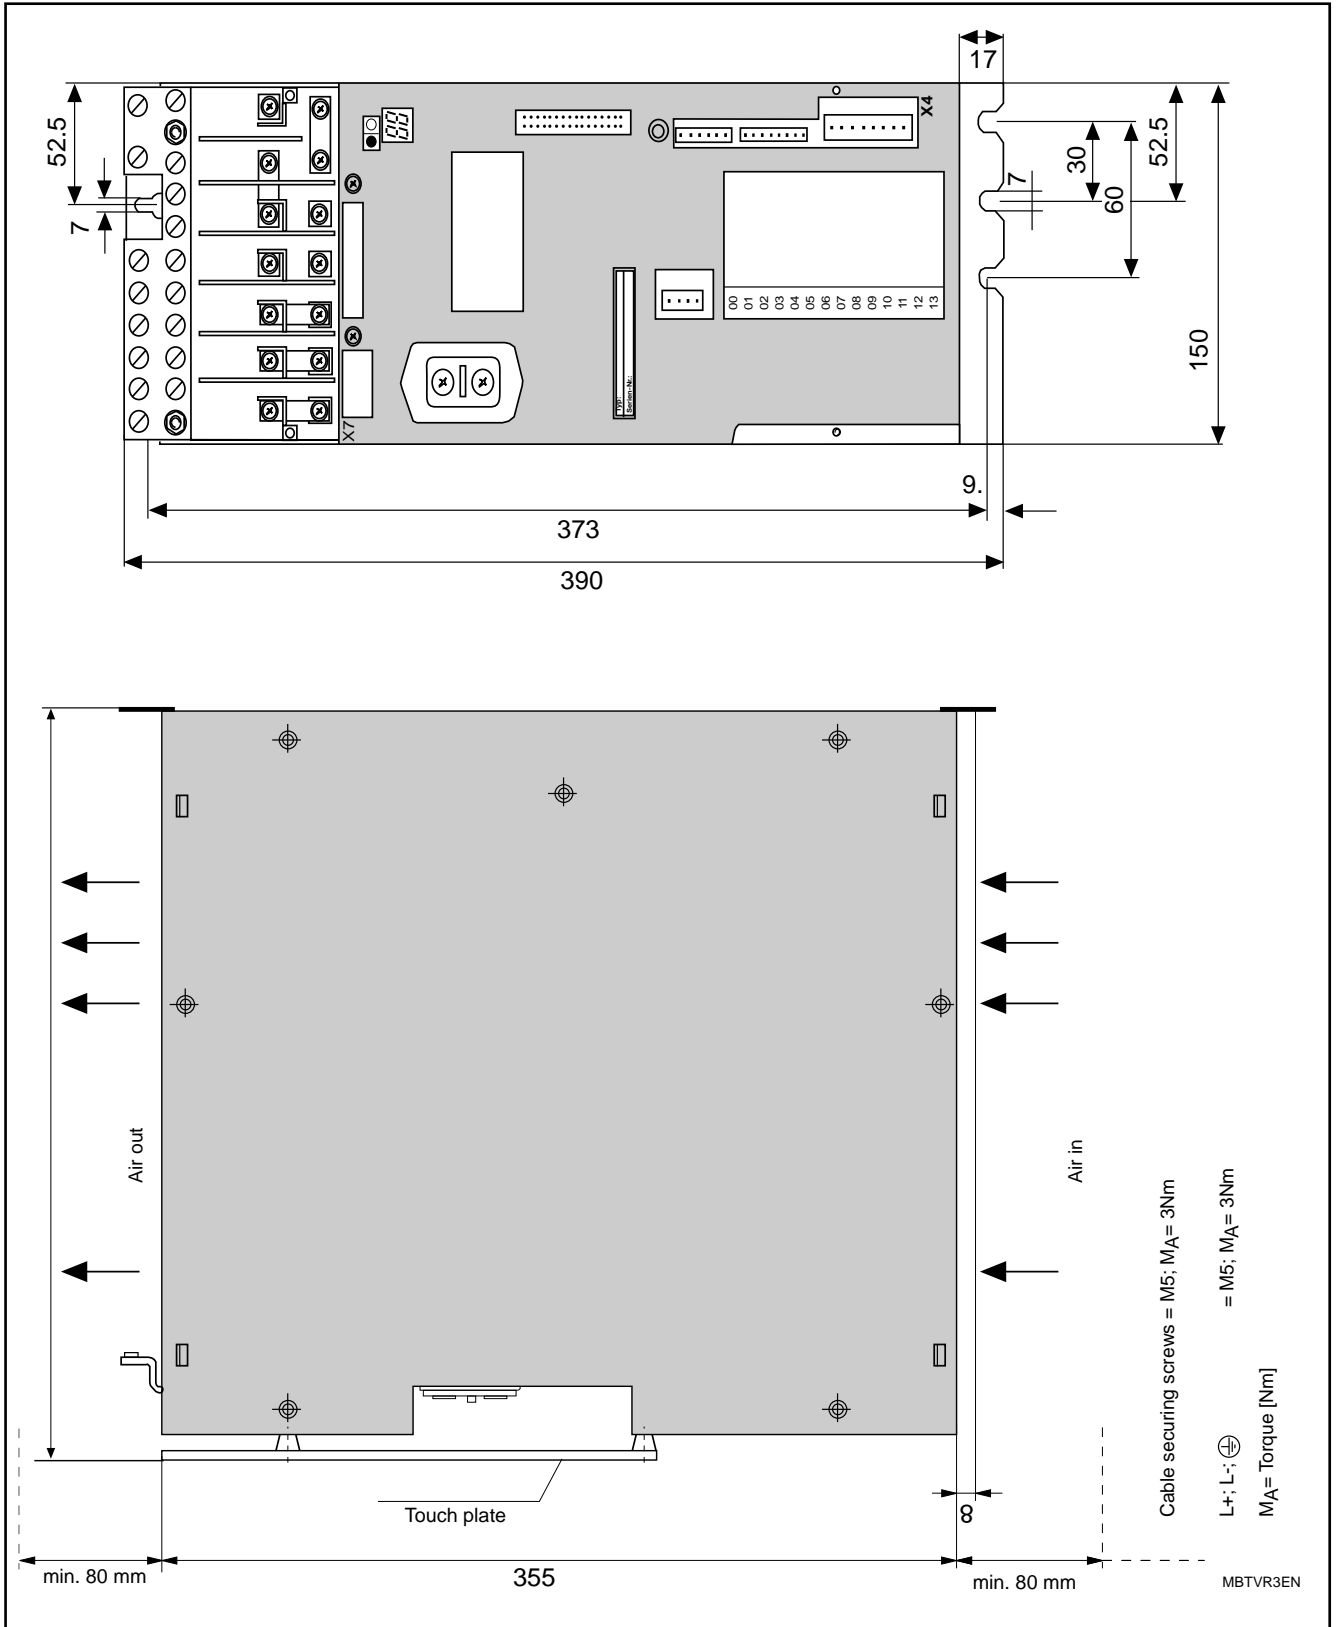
Dimension sheet for TVR 3.1 power supply module
